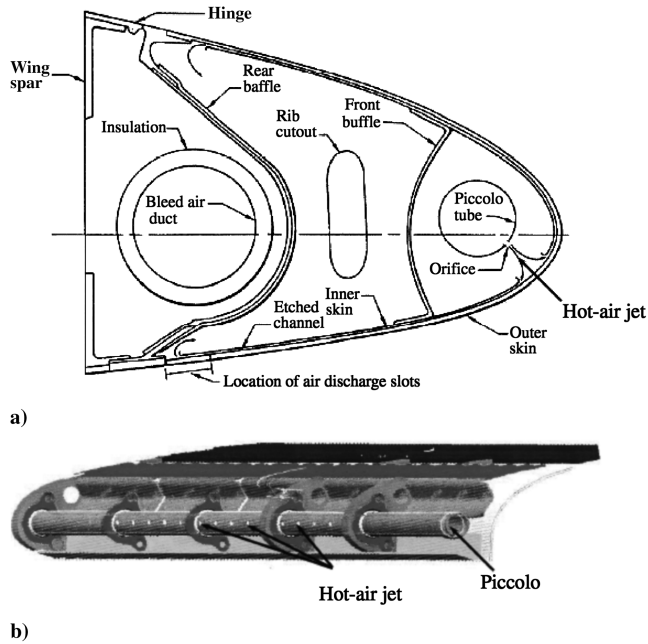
Internal layout of the piccolo tube inside a) a typical wing leading edge and b) a typical slat (courtesy of Bombardier Aerospace).
